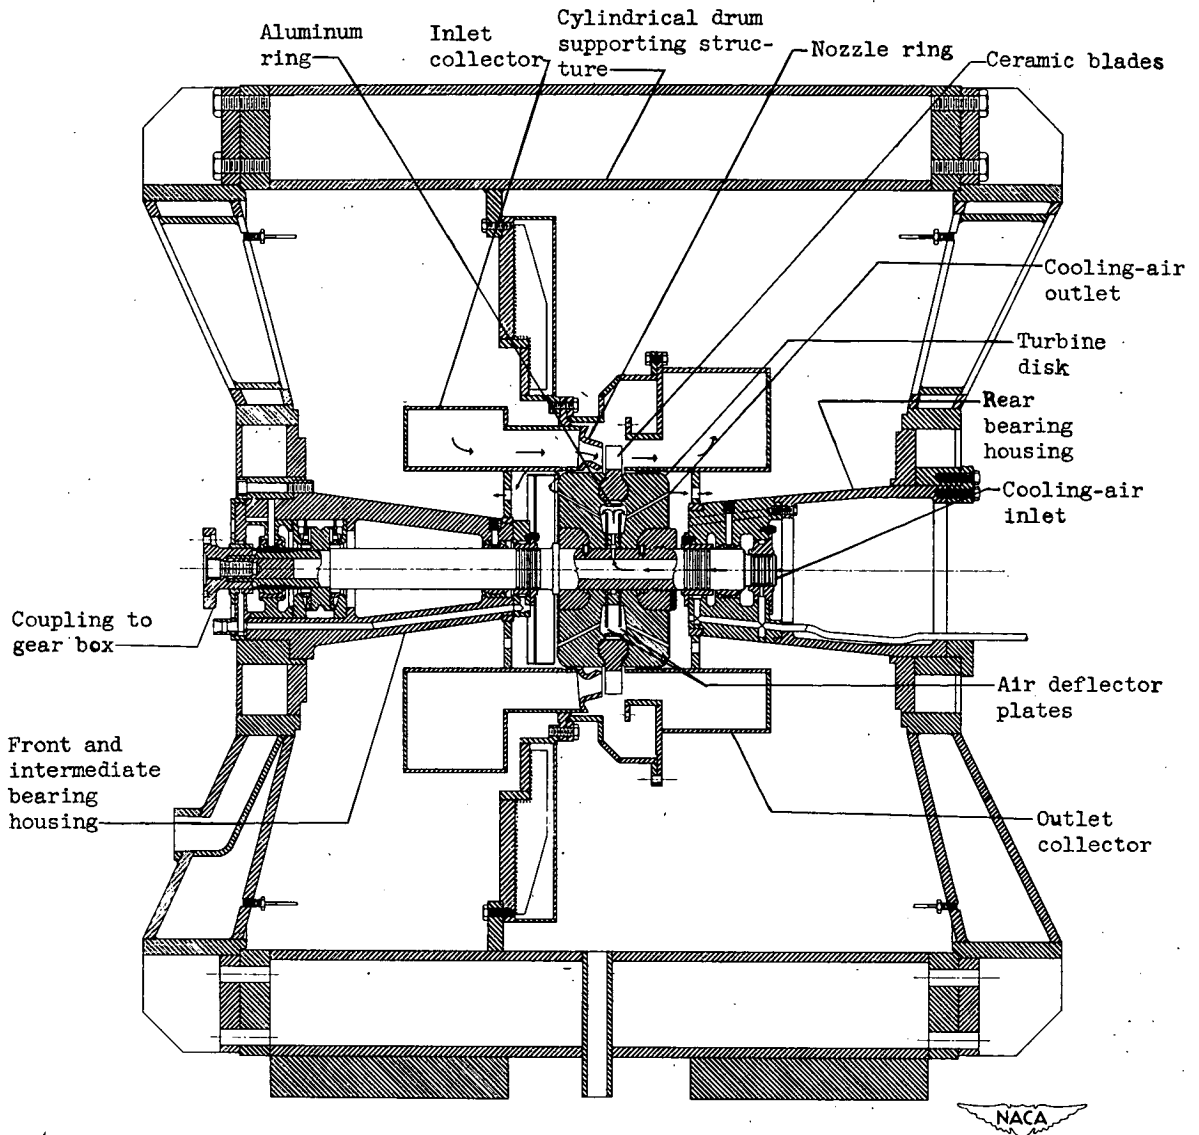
Ceramic-bladed turbine assembly and supporting structure.
